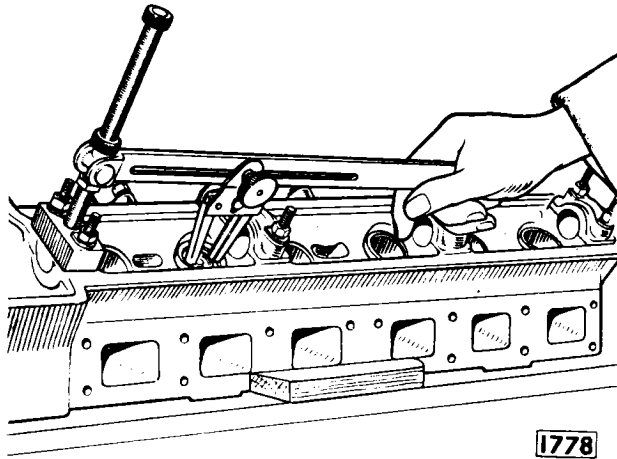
Fitting the valve springs utilizing the valve spring compressing tool Churchill tool No. J.6118.
